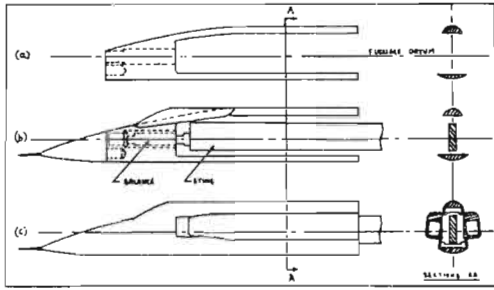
SKETCH SHOWING MODEL ASSEMBLY.
